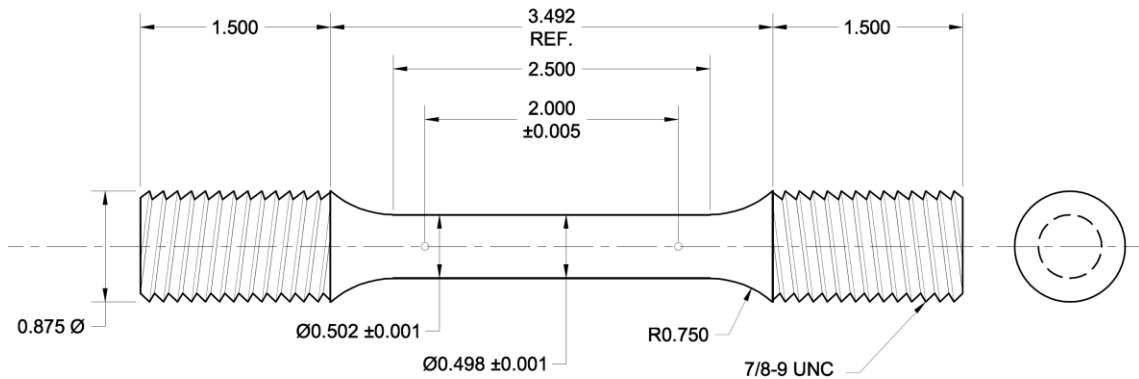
ASTM E 8 coupon dimensions (all dimensions in inches)
